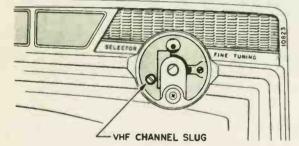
Front View of VHF Tuner In Table Models With Son-R Tuning. Knobs Removed.
